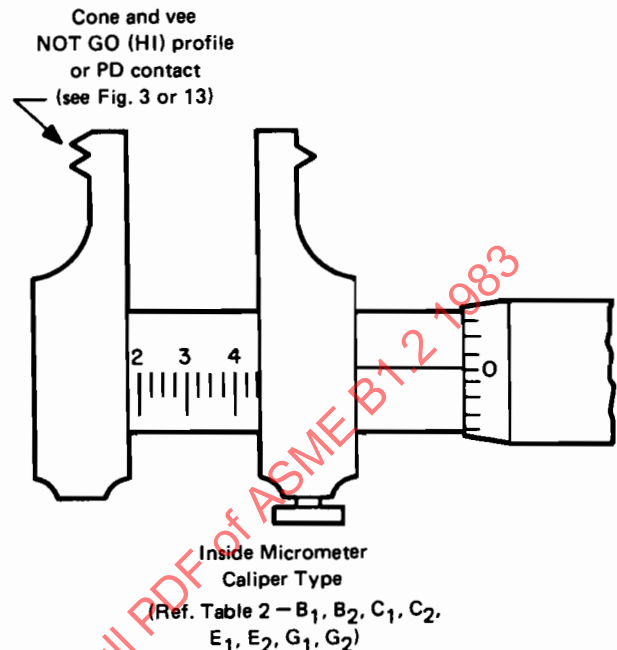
INSIDE MICROMETER, CALIPER TYPE
